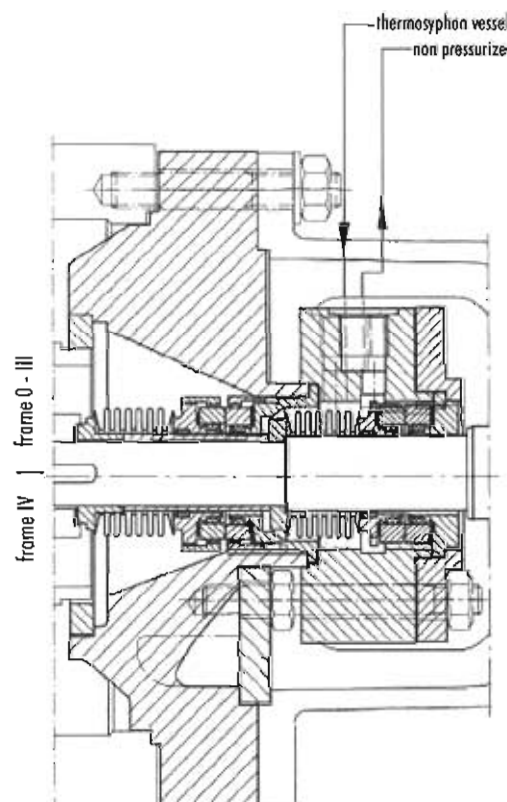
Tandem bellows seal arrangement in a tapered seal chamber
